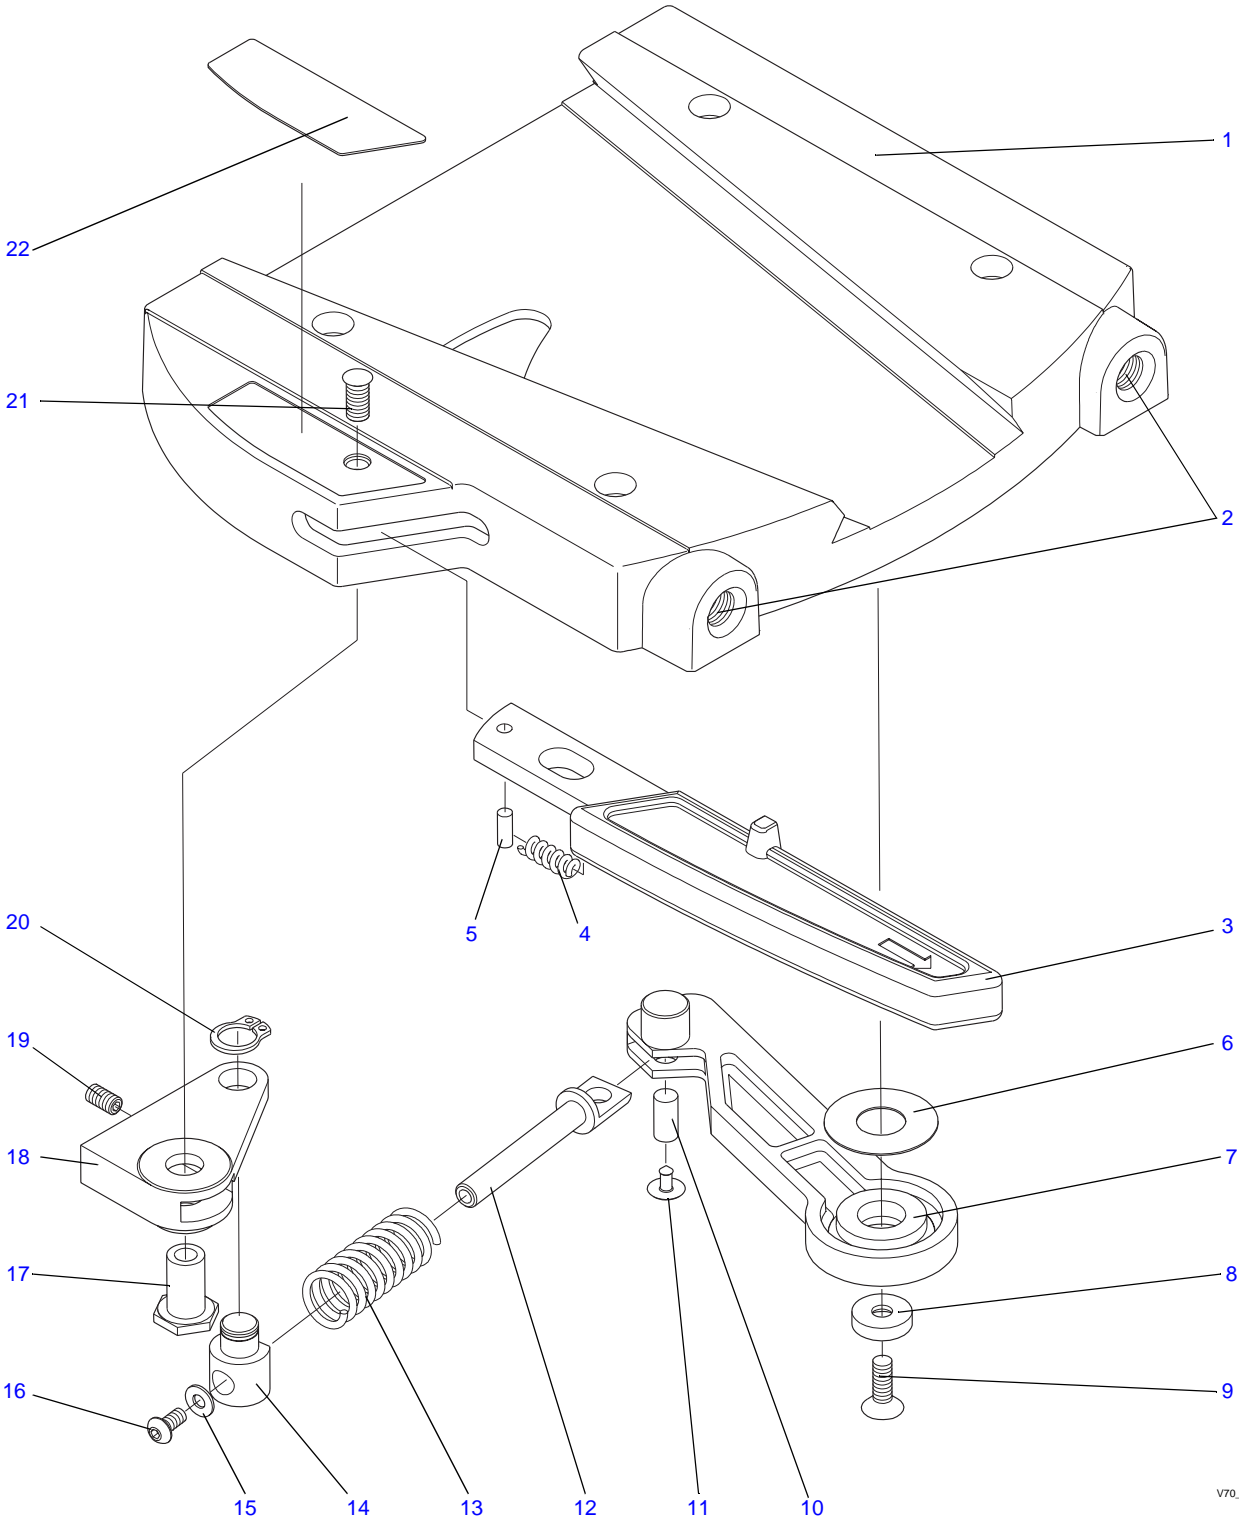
Vector 70/70H Pan and Tilt Head - Wedge adaptor assembly
